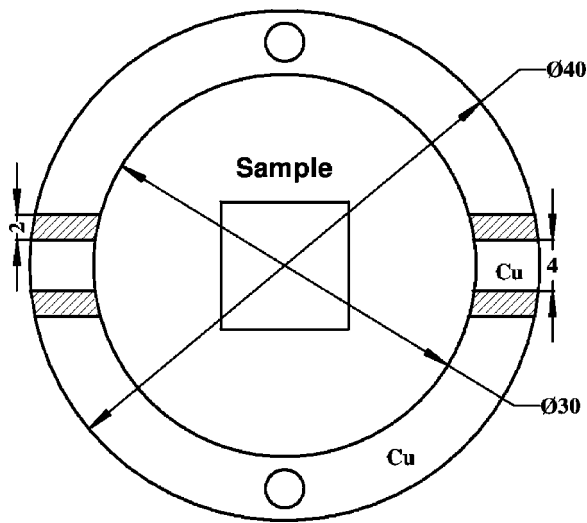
Sectional view of the anode wire mount made of 2 mm thick copper clad circuit board. All dimensions in mm.
